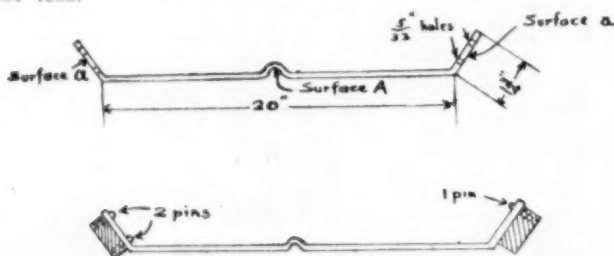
FLAT WIRE PIECE TO BE PLATED
